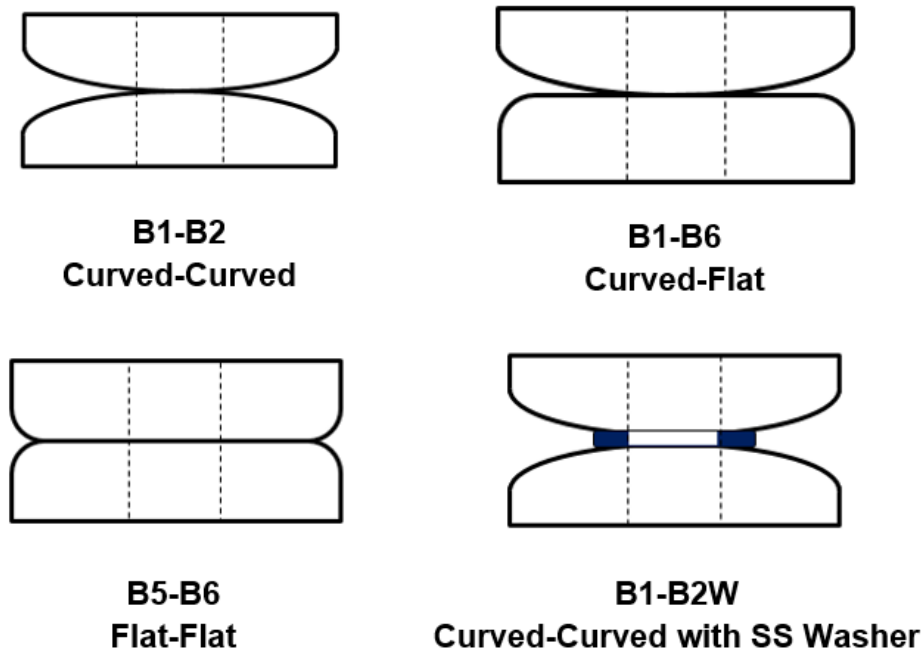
Drawing of the convex (left) and flat (right) interfaces
